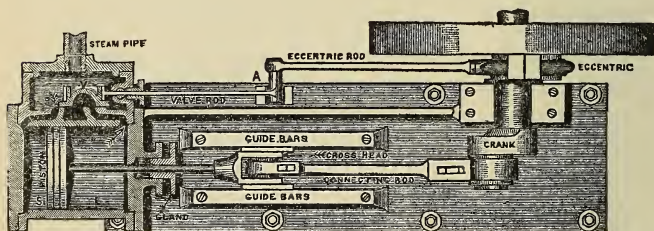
Plain horizontal slide valve engine; view showing parts.
